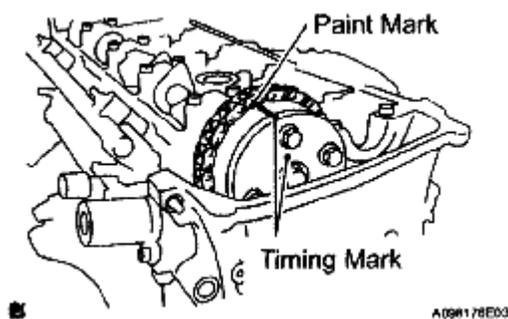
Aligning Paint Mark With Timing Mark In Camshaft Timing Gear
